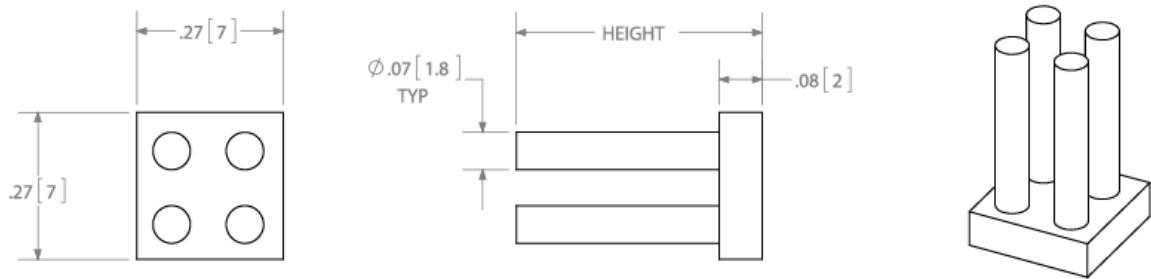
Heatsink, 4-02027U mechanical drawing, where height = 17.2 mm
